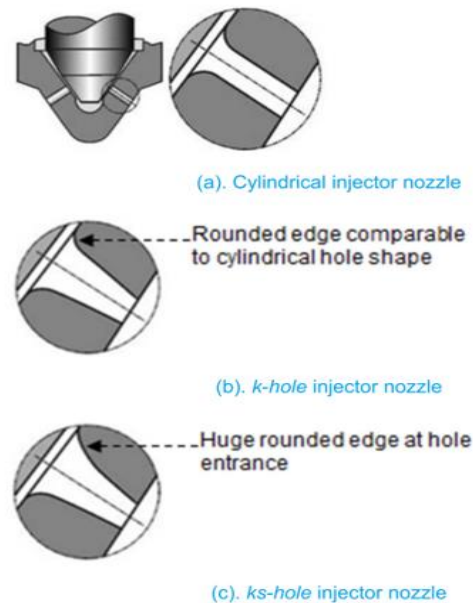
Layouts of cylindrical, K, and ks nozzle holes. Adapted from [52].
